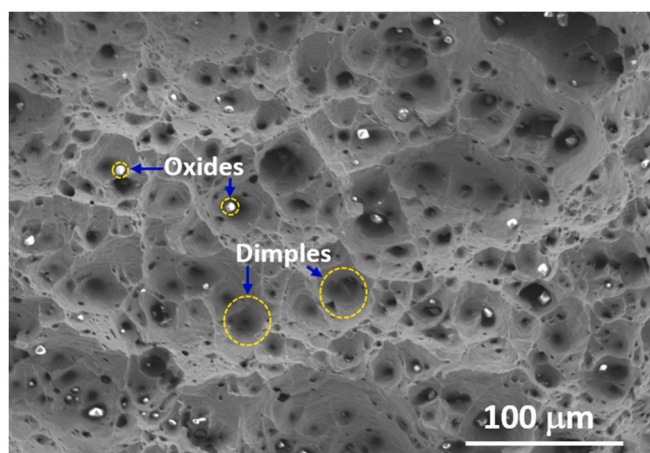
Fracture surface of the CoCrFeMnNi gas metal arc welded joint with ER410-NiMo filler.
